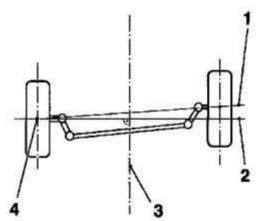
Wheel Offset: 1 - line of angular deviation, 2 - axis perpendicular, and 3 - axis of symmetry, 4 - wheel contact point
